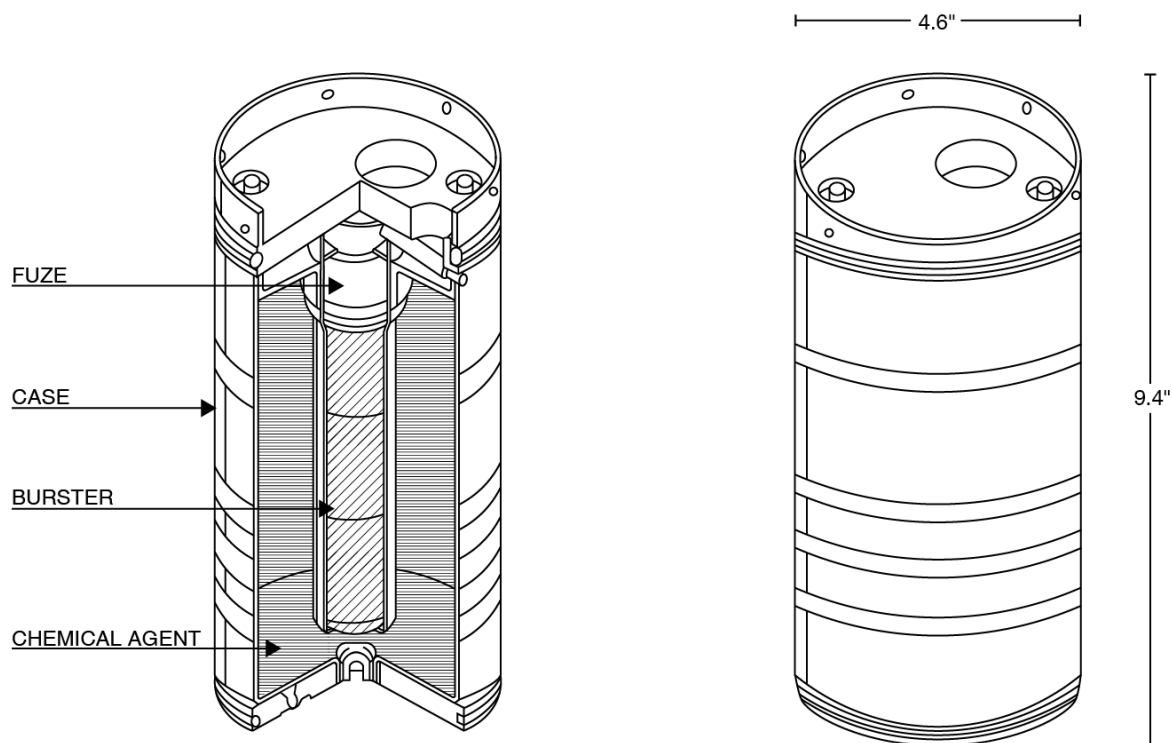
Bomblet, BLU-19/B23 - Line Drawing
